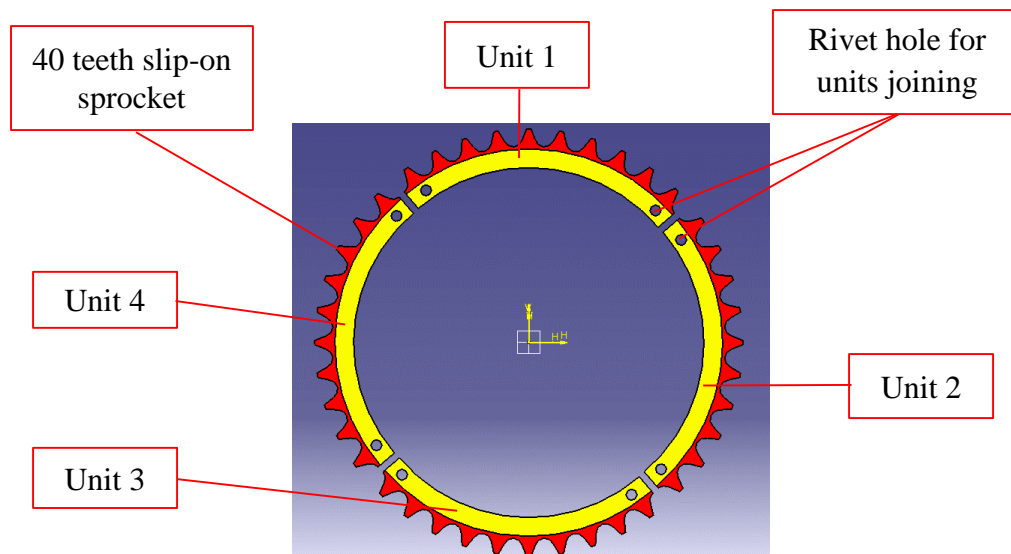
2D drawing of slip-on sprocket for selected sectioning option
